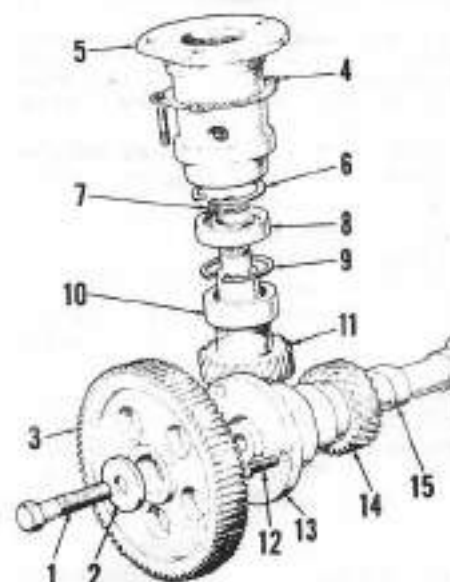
Exploded view of 3-cylinder diesel injection pump drive gears; refer to Fig. 62 for cross-sectional view and to Fig. 60 for retiming pump drive gear to camshaft.
